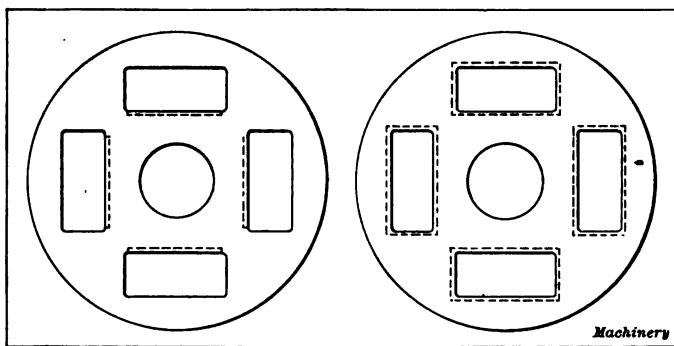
Plan View showing Four Rectangular Holes which are finished by Two Broaching Operations
